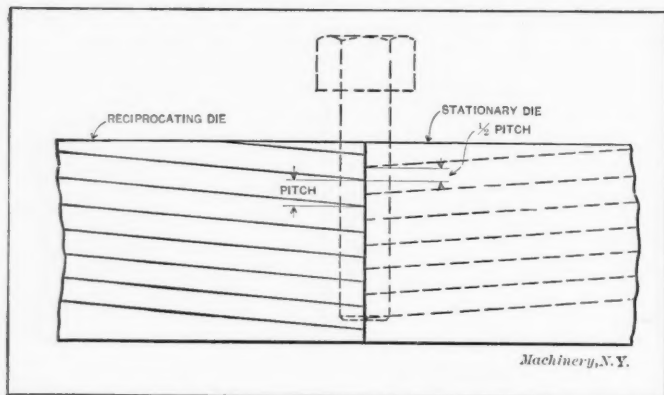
Diagrammatical View showing the Relative Positions of the Thread Rolling Dies when starting to roll a Thread
